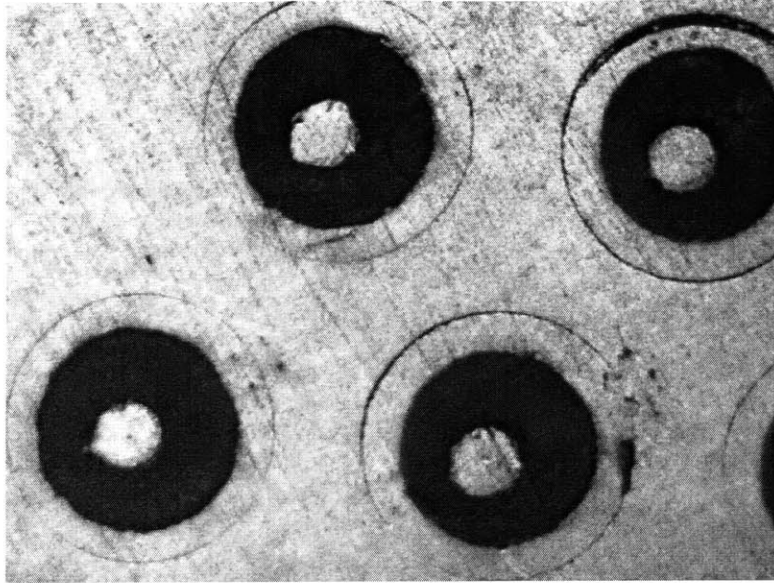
Semi-rigid coaxial wire milled flat, then plated.
